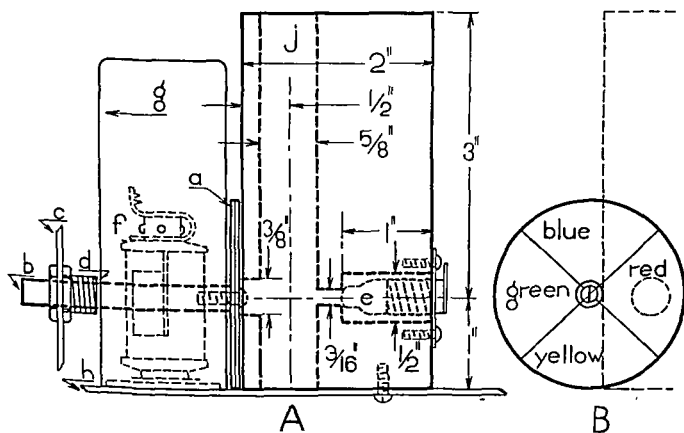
A, optical system; a, circular glass plates with interposed selective color filters; b, filter control shaft; c, front panel; d, shaft bearing; e, projection chamber containing flashlight lamp; f, phototube and socket; g, phototube shield; h, subpanel; j, test tube receptacle B, arrangement of selective color filters between circular glass plates.
